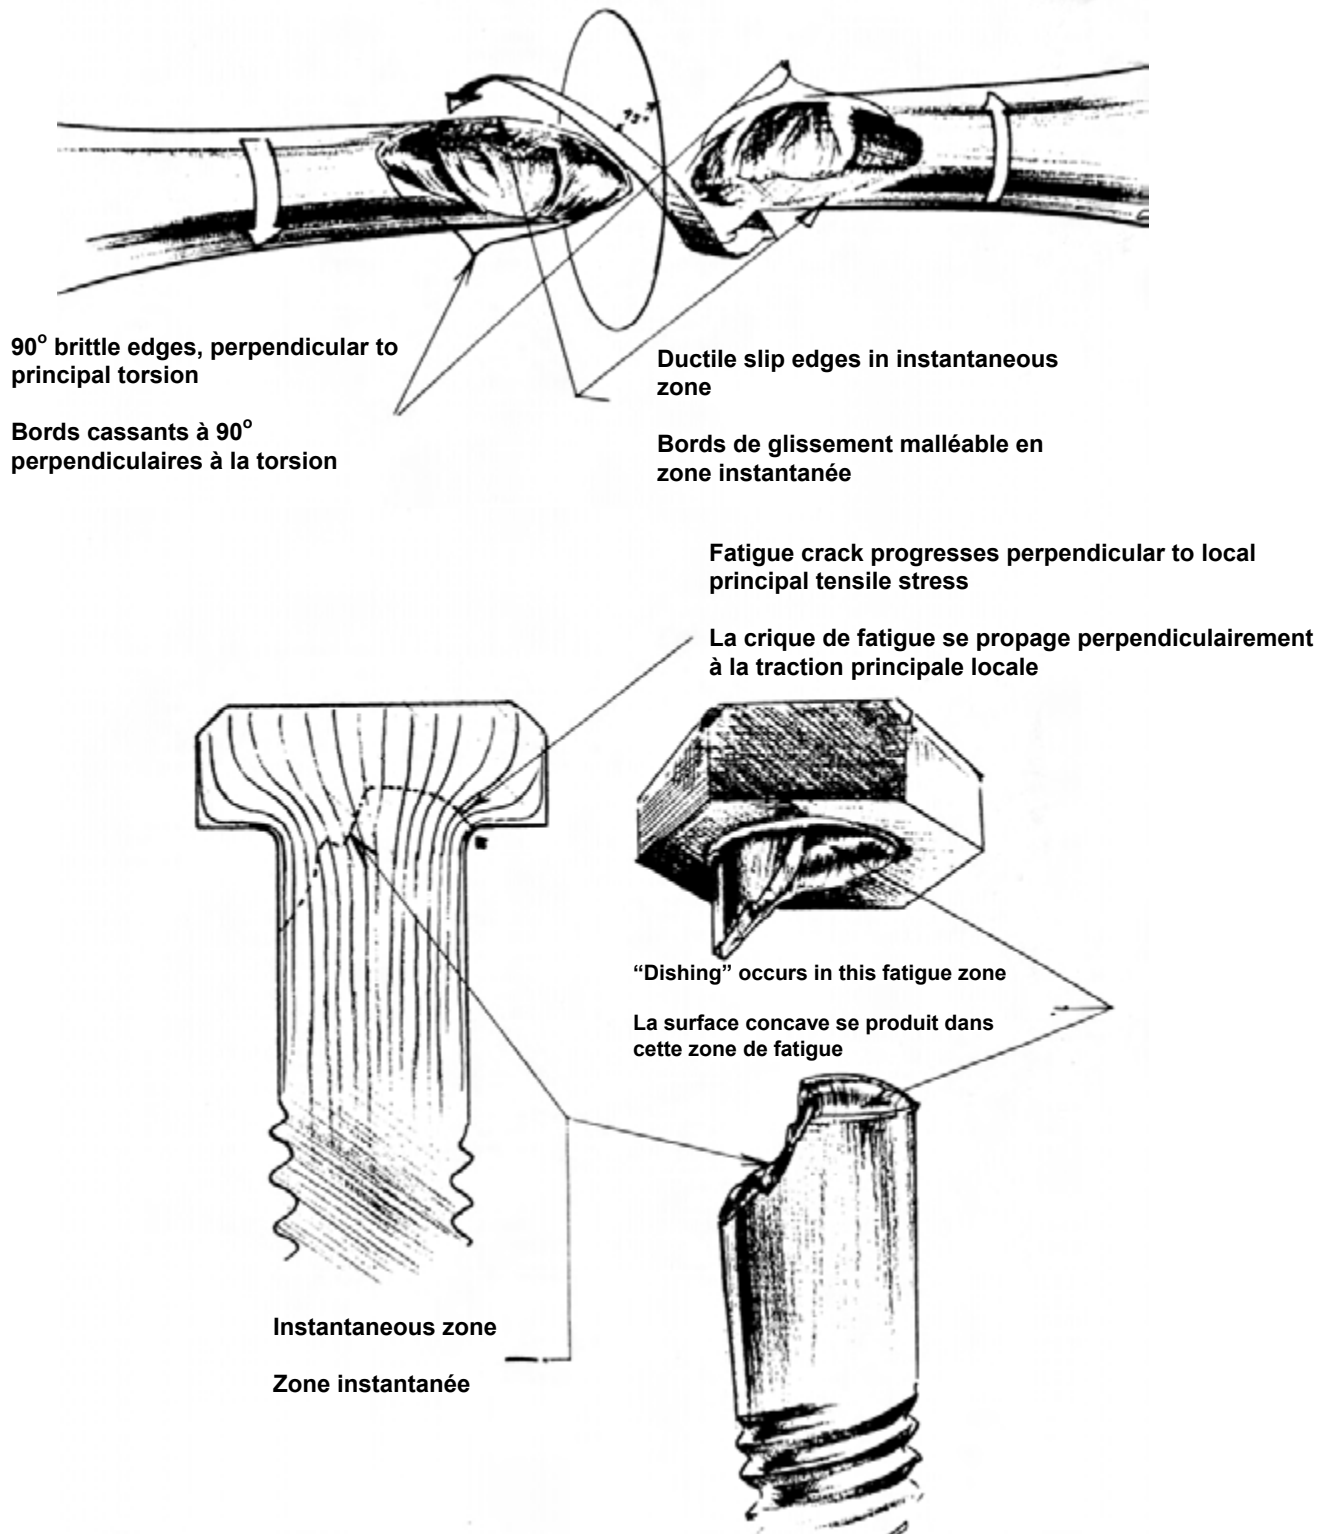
A-29 (2 of 3) Torsion fatigue failure
